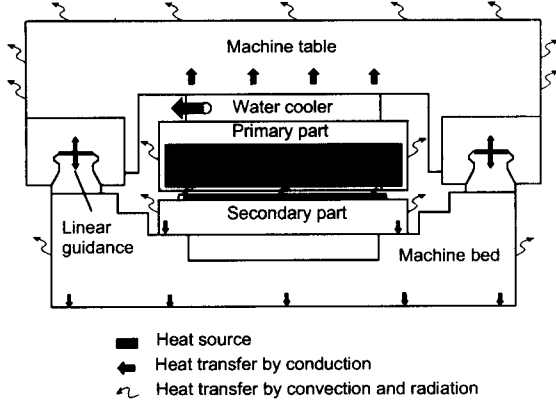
Heat transfer mechanism in machine structure with linear motor
